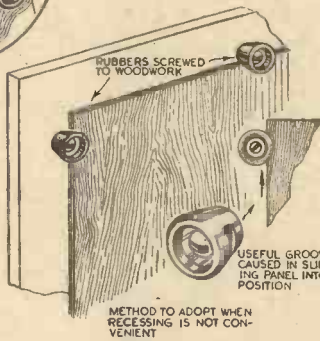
Grooves cut into rubbers as shown make an ideal method for holding the panels in place
